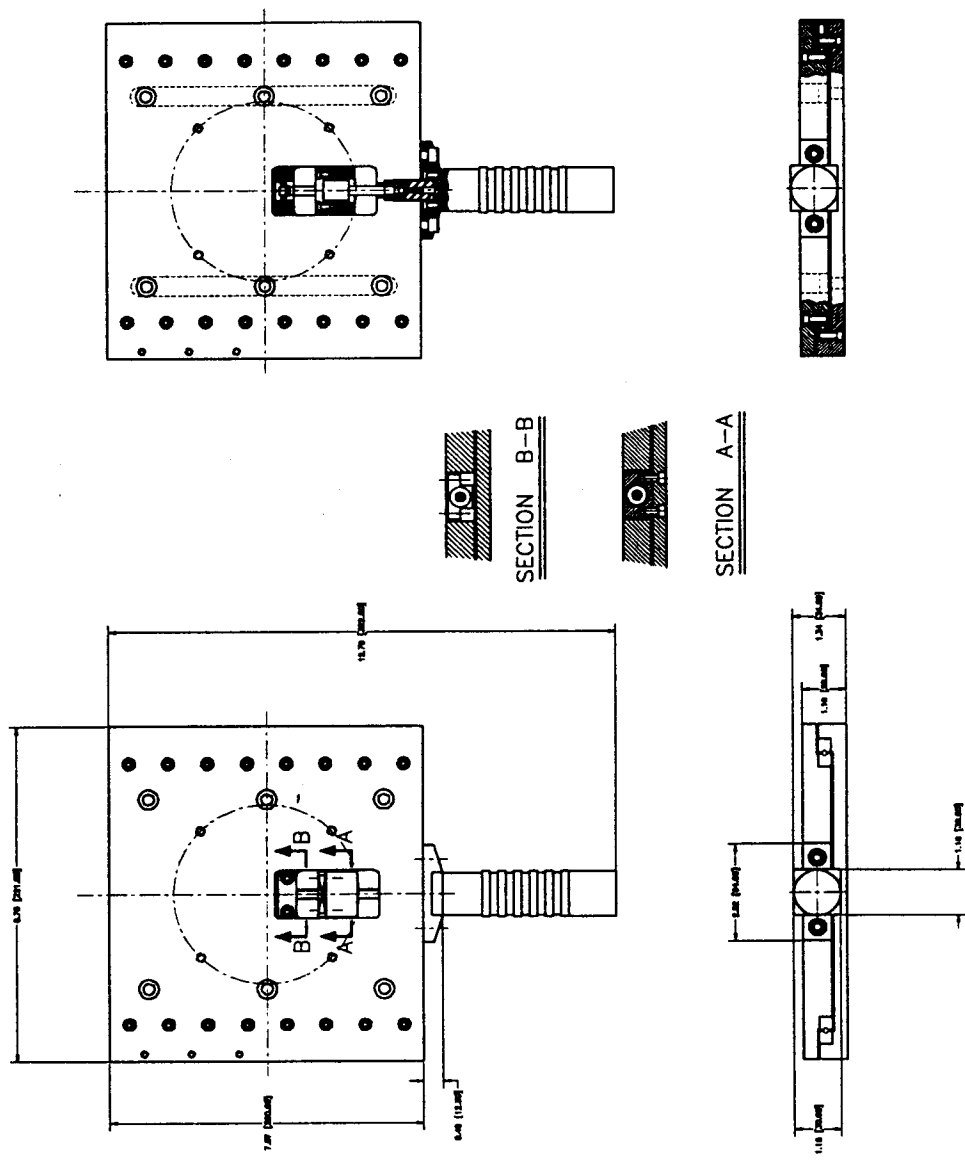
PBPM HORIZONTAL STAGE ASSEMBLY
